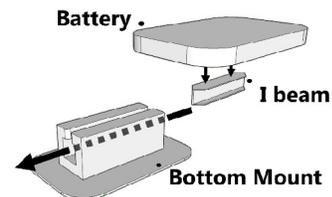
Mounting hardware. The bottom mount is glued to the top of the bat head between the ears.
